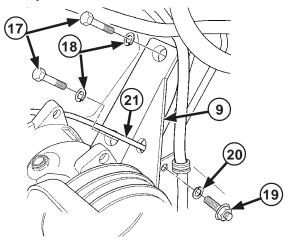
Compressor Mounting Bracket to Cylinder Head
